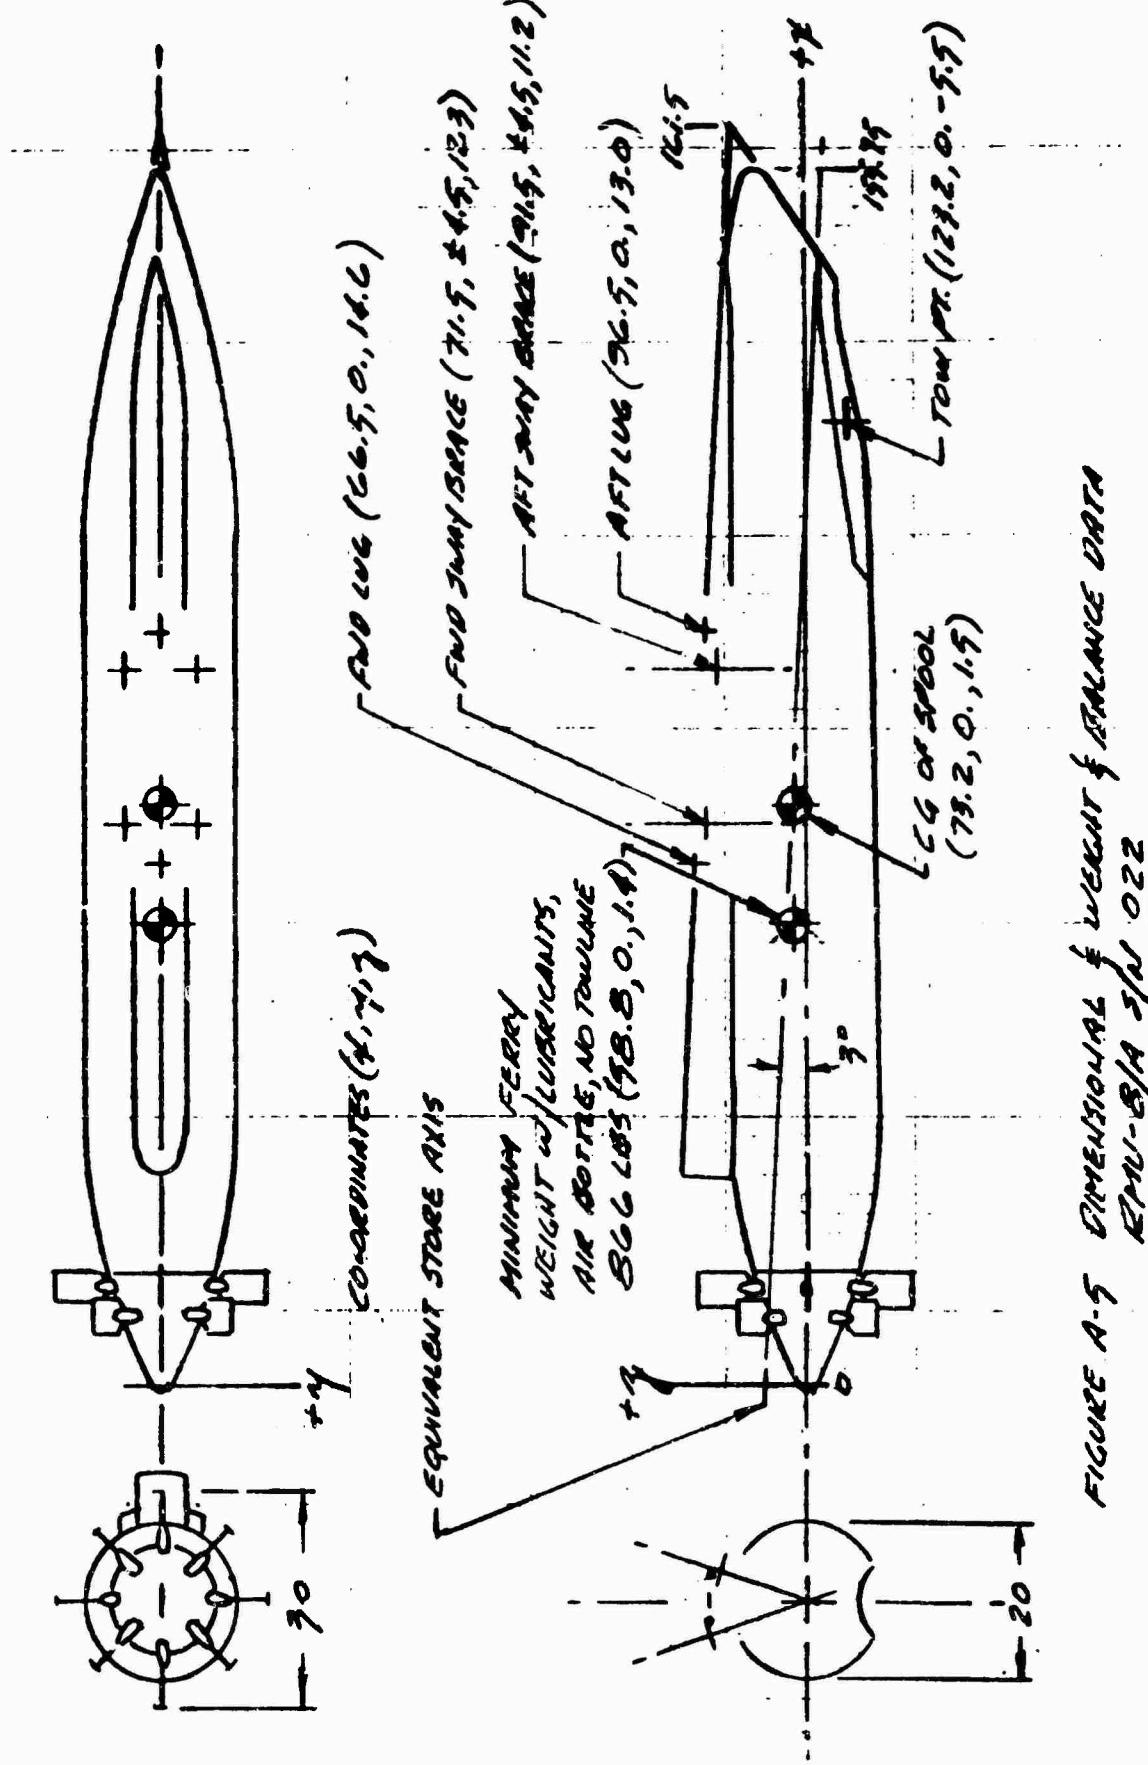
DIMENSIONAL DRAWING OF WEIGHT & BALANCE DATA
